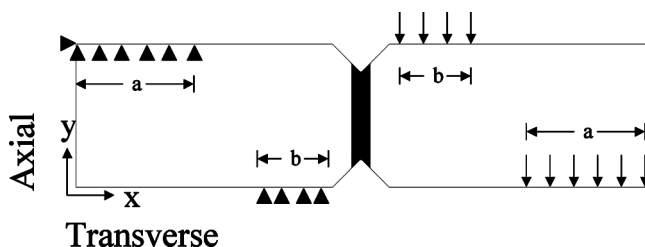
Adhesively bonded Iosipescu shear specimen.
